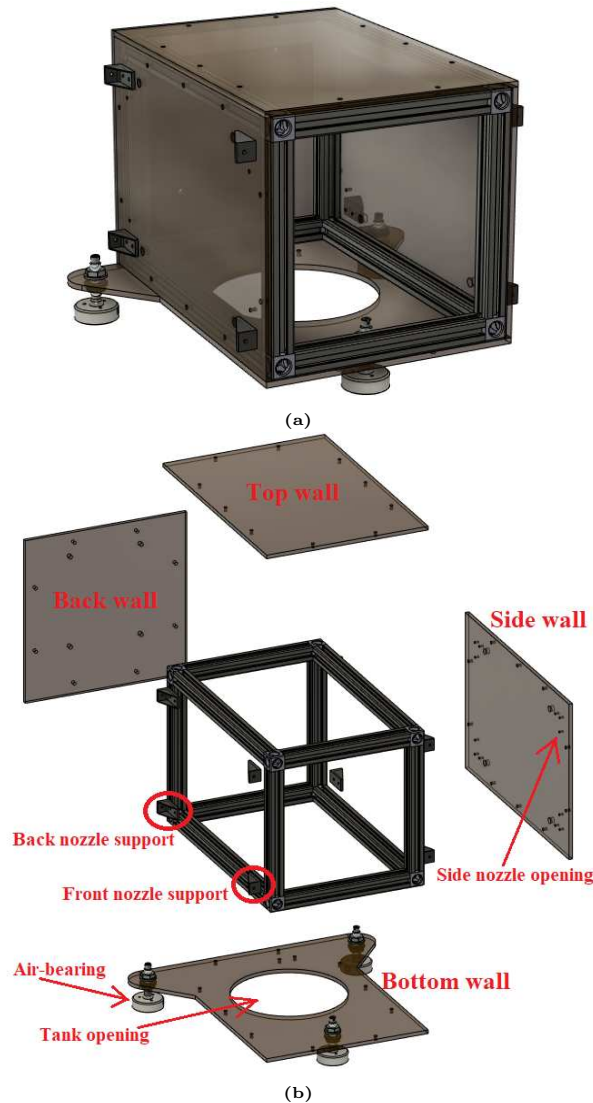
(a) CAD model of the initial solution and (b) exploded view.
